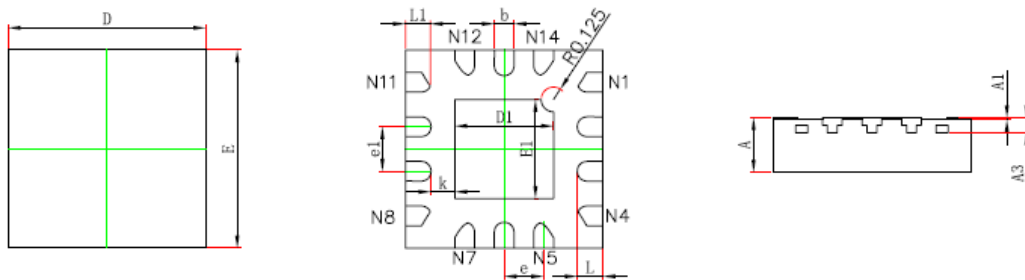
QFN2\*2 14L (Thin Outline) Package Drawing
